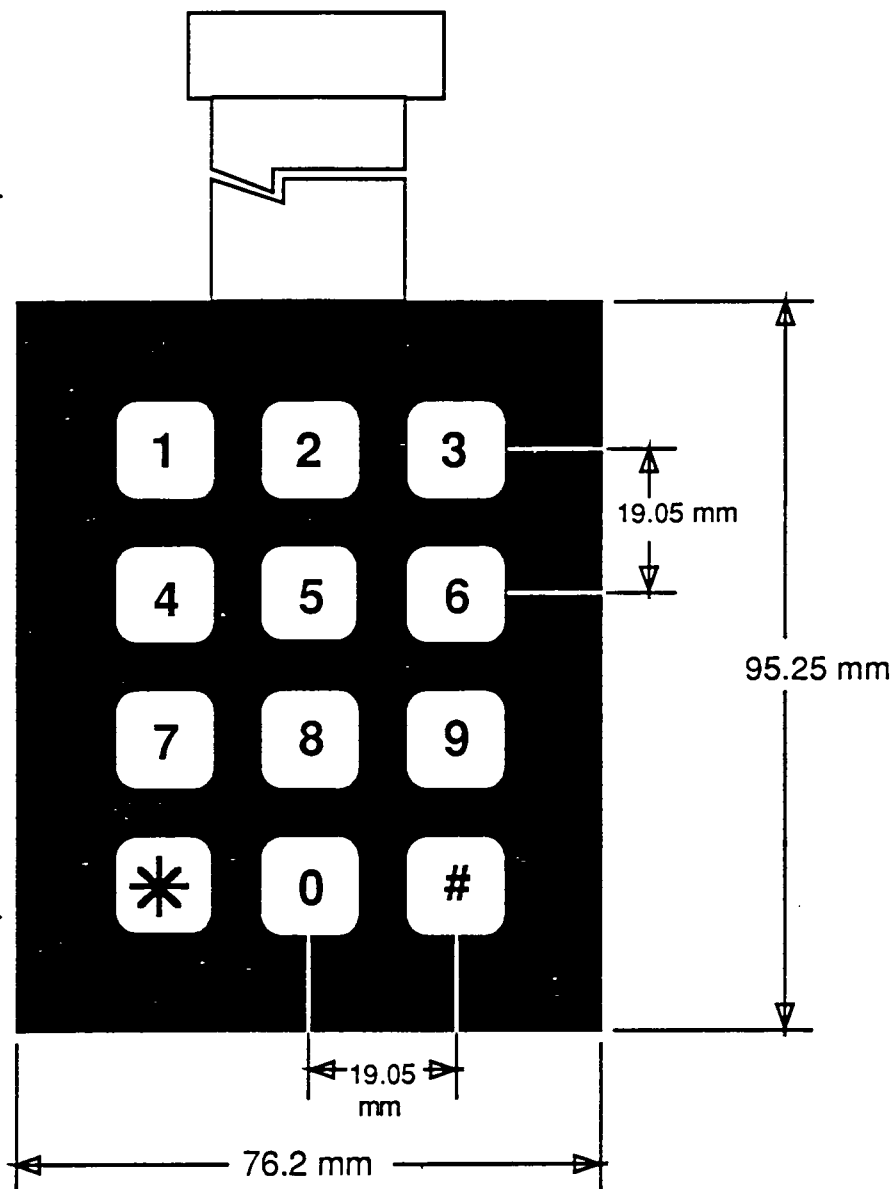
Size, shape, labeling, and layout of touchpads used in Experiments I and II
